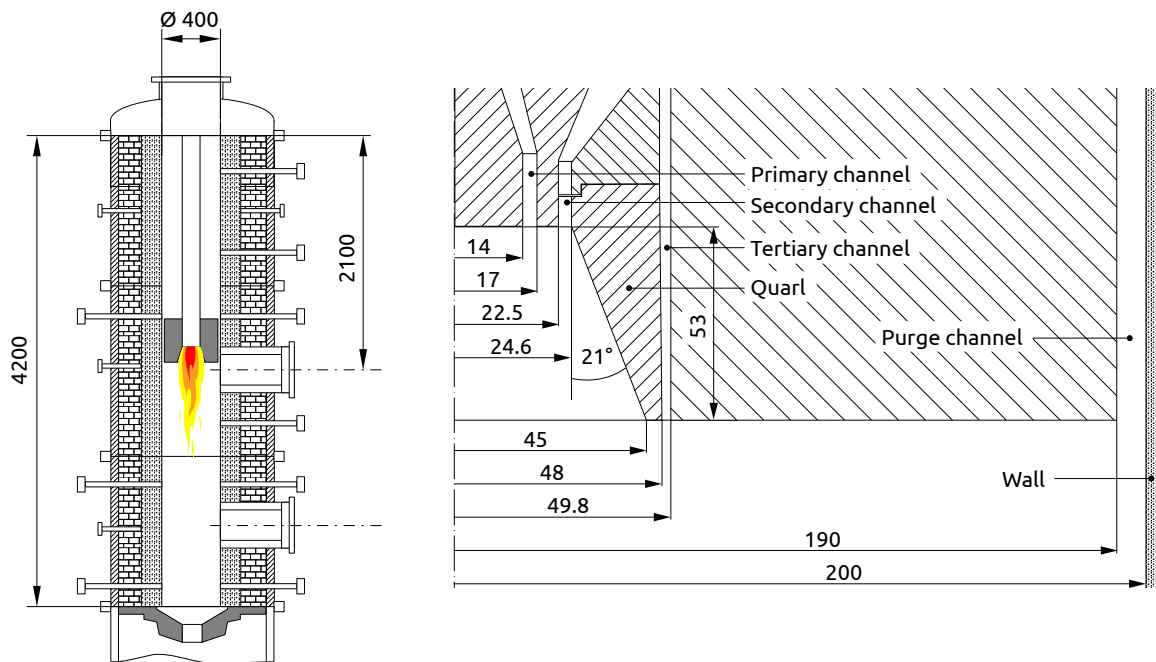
Left: cross-section of the WSA combustion chamber. Right: symmetrical half of the WSA40 reference oxyfuel burner. Dimensions in millimeters [116].
